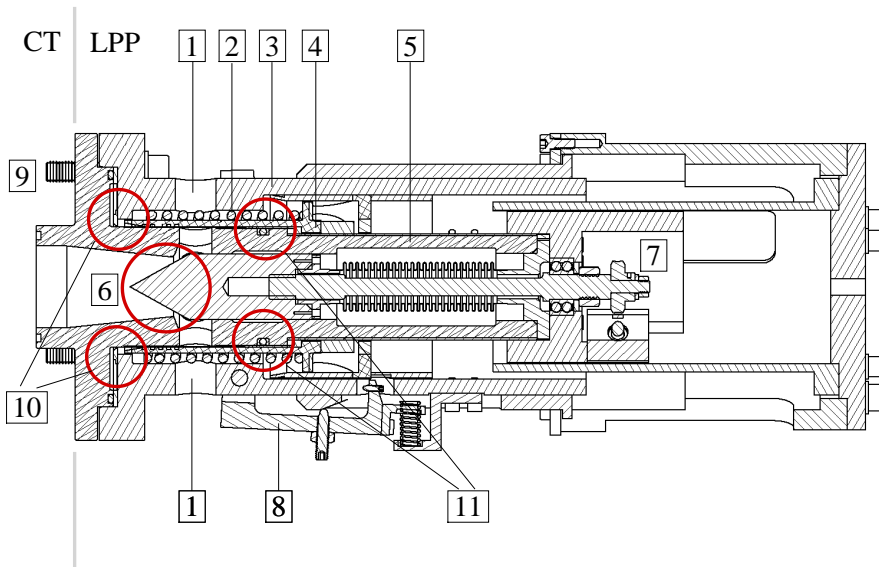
Cross-section of the Fast Opening Valve (FOV) at the aperture instance. 1. venting holes (closed), 2. spring (still almost completely compressed, but releasing its force), 3. outer body, 4. sliding cylinder (SC) (obstructing the venting holes, and pushed towards the right by the spring), 5. inner body, 6. nozzle with adjustable throat section, 7. nozzle actuating system, 8. one of the three radial clamps – open position (not engaging the SC, which is thus free to move under the spring force), 9. flanged connection to CT, 10. first sealing element (static pad) – not engaged by the SL (not sealing), 11. second sealing element (dynamic O-ring) – engaged position (compressed between the SL and the inner body, where it is grooved).
